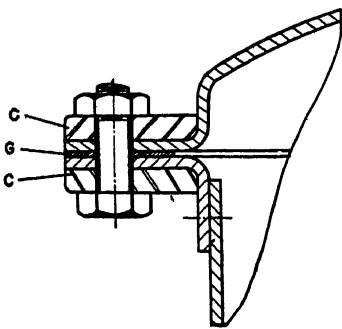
Reinforcing Flanges for Cover Plates.
